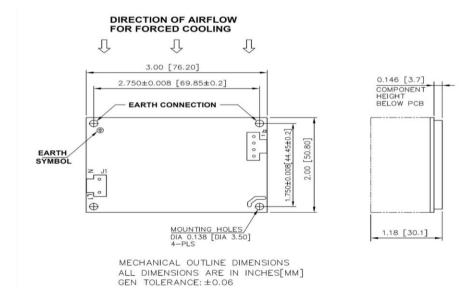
Mechanical Drawing - Molex Header (Option 2)
